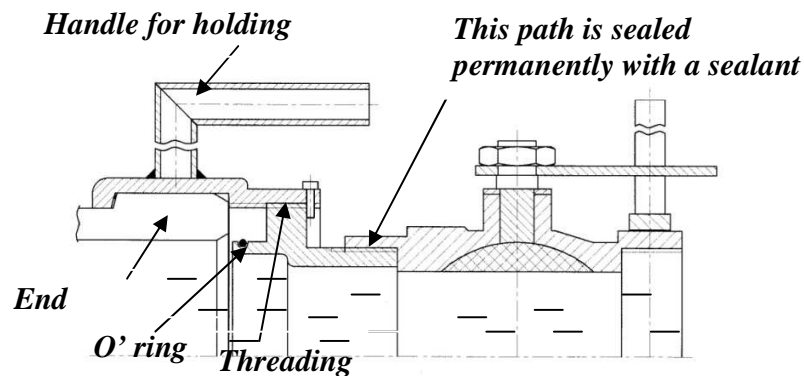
Device placed onto the End Fitting, O' ring is out of the End Fitting
